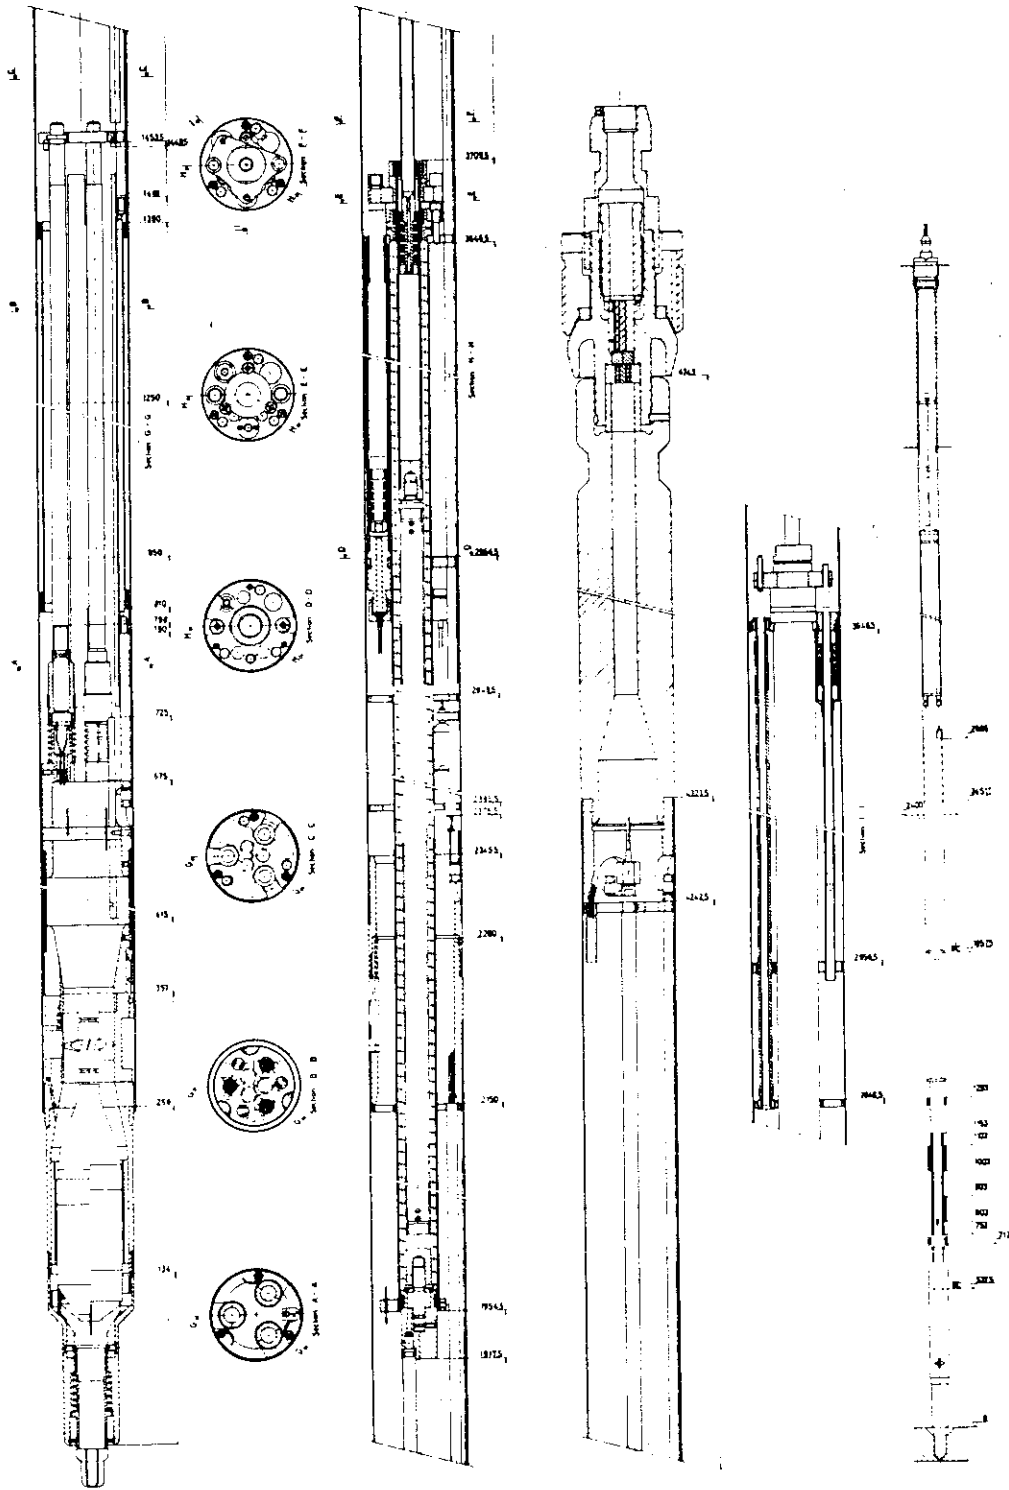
IFA-519 (JAERI/HiTo) test assembly drawing
